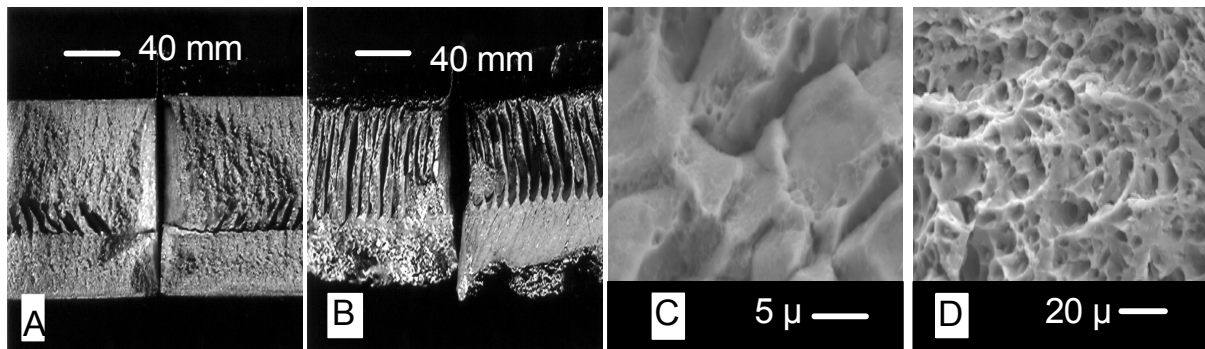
Fracture surface of the weld (A, C) and the weld tested after the 4 minutes torch treatment (B, D). Dimples on the nugget grains (C) and macro-dimple enrichments (D).
